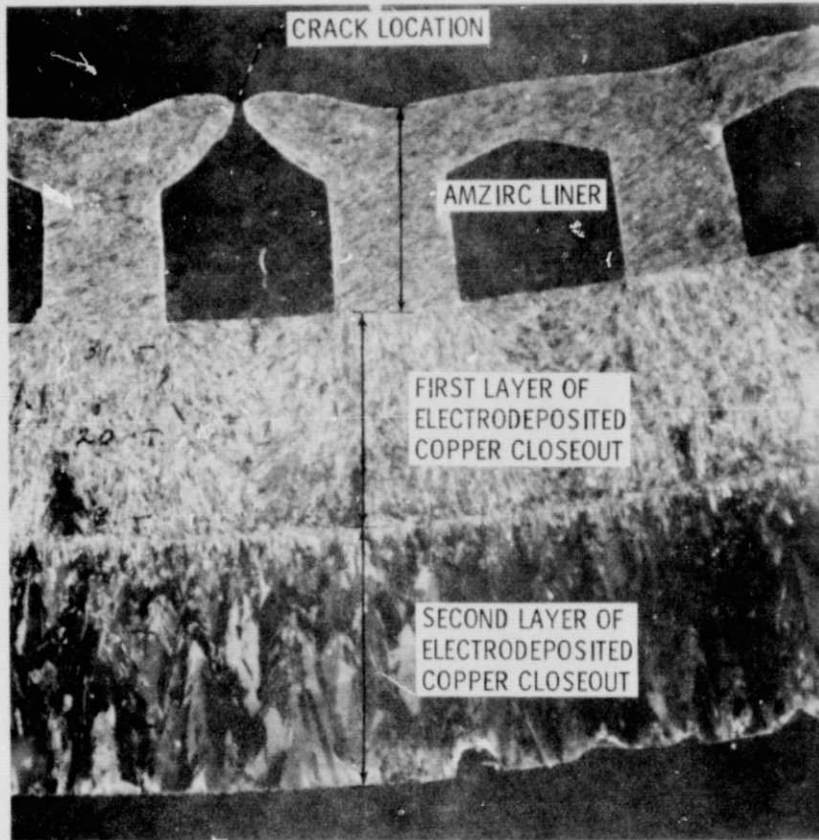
Cooling channel wall failure in Amzirc cylinder S/N 44.
